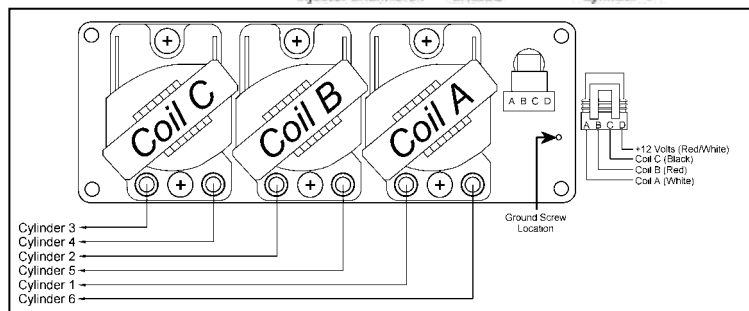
Typical In-Line 6-cylinder DFU wiring.
